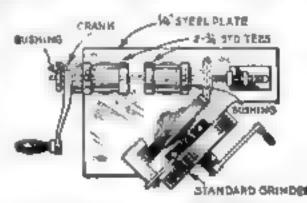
Top view of the valve-greating machine that utilizes a small tool grinder
